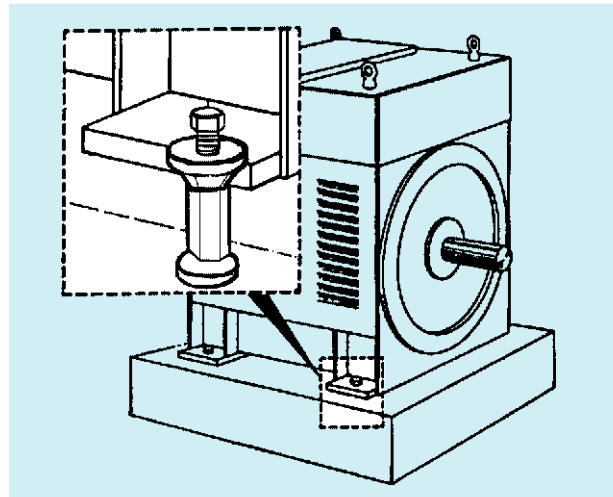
Motor mounted on a concrete base with foundation studs.
